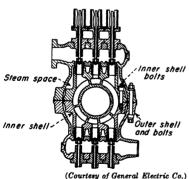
Vertical turbine cross section illustrating double shell.
